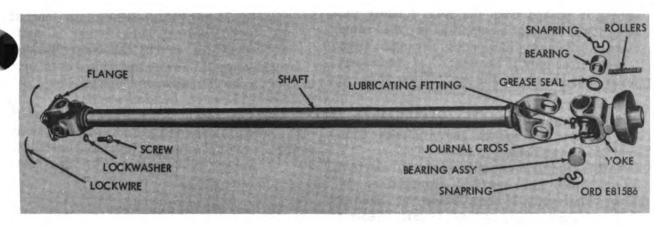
Propeller shaft and universal joint—partially exploded view.
